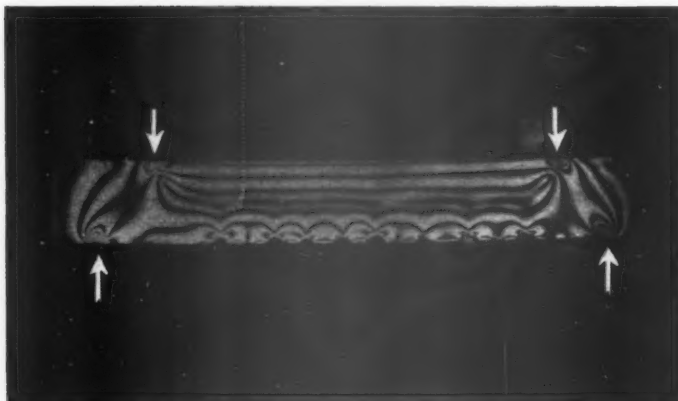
Longitudinal section of connecting rod flange, showing grooves made by chipped trimming die. Pure bend. Grooved face of flange in tension. Arrows show points of load application.
